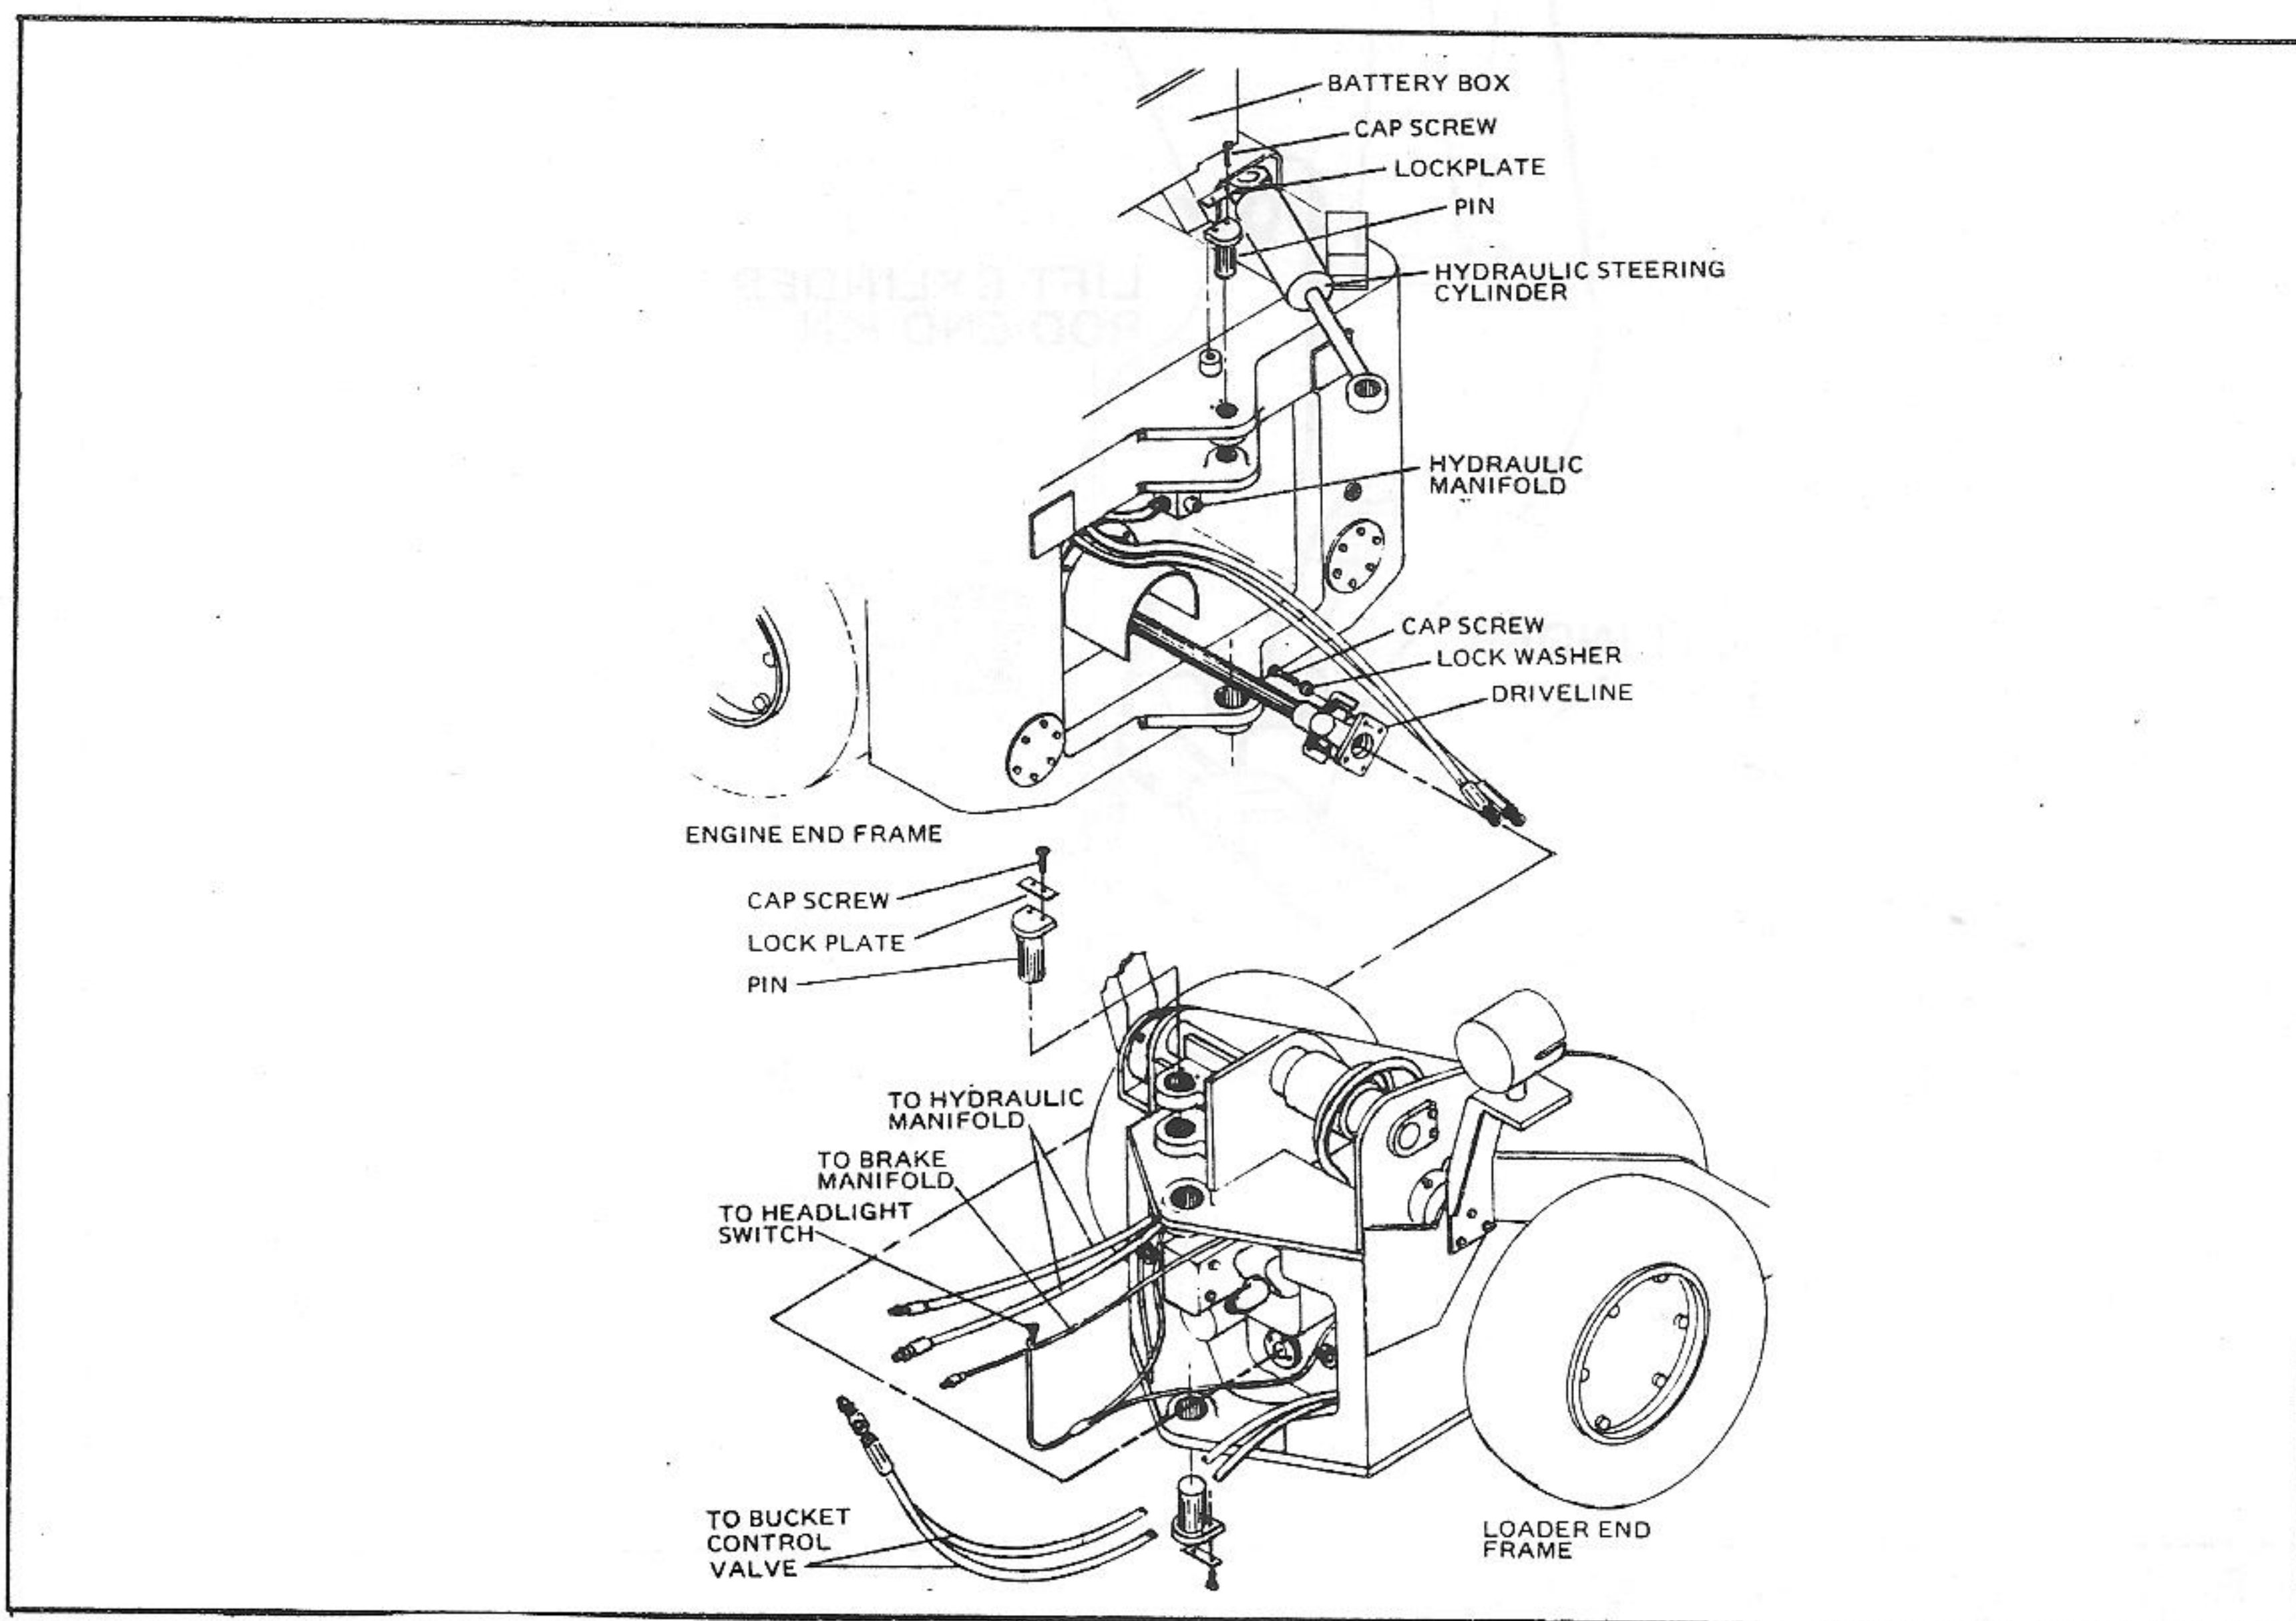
4. LOADER END FRAME ASSEMBLY
